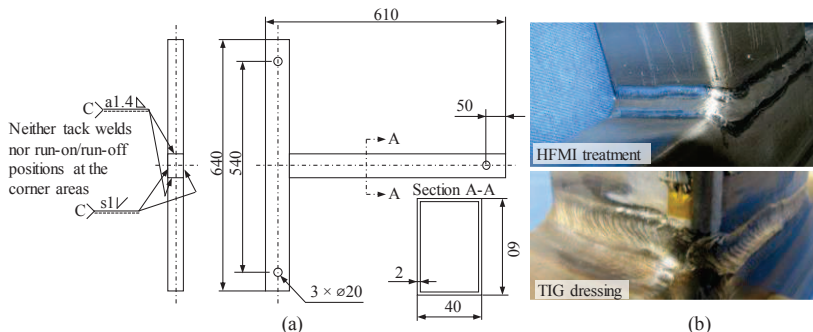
(a) Specimen dimensions, and (b) examples on PWTs
